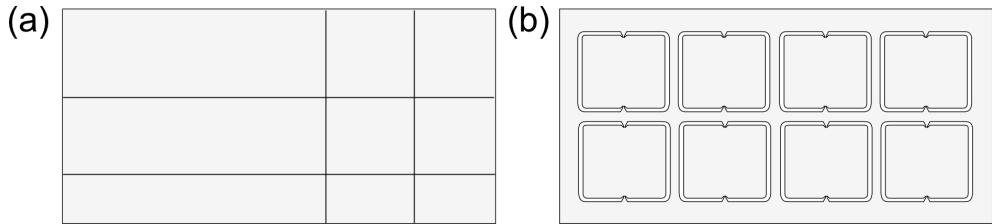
Steel used for coating the (a) sheet and (b) pre-cut steel, with coupon dimensions of 17 mm x 15 mm.
